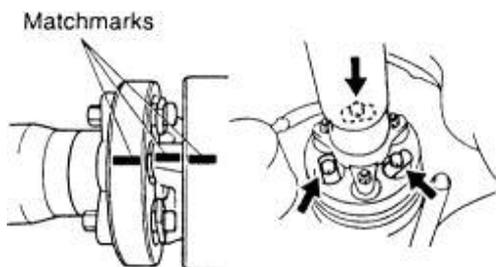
Align the matchmarks and install the 3 washers with bolts to the shaft coupling
